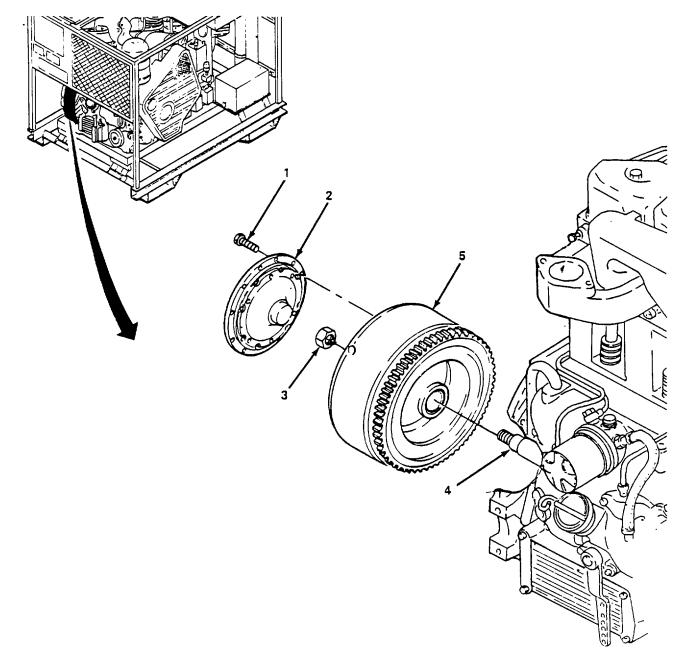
Flywheel and Clutch Carrier, Replace.
